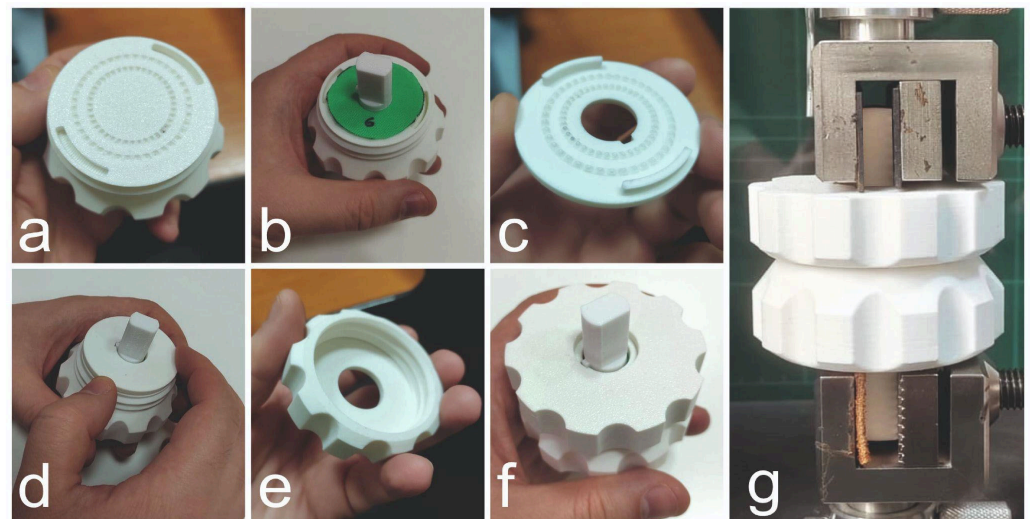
Assembly of the perpendicular-dolly fixture and mounting in the testing machine: (a) threaded support body; (b) dolly with textile placed on the support; (c) fixing/indexing plate; (d) plate positioned to clamp the textile; (e) threaded cap; (f) cap tightened to complete the assembly; (g) assembled fixture mounted in the universal testing machine.
